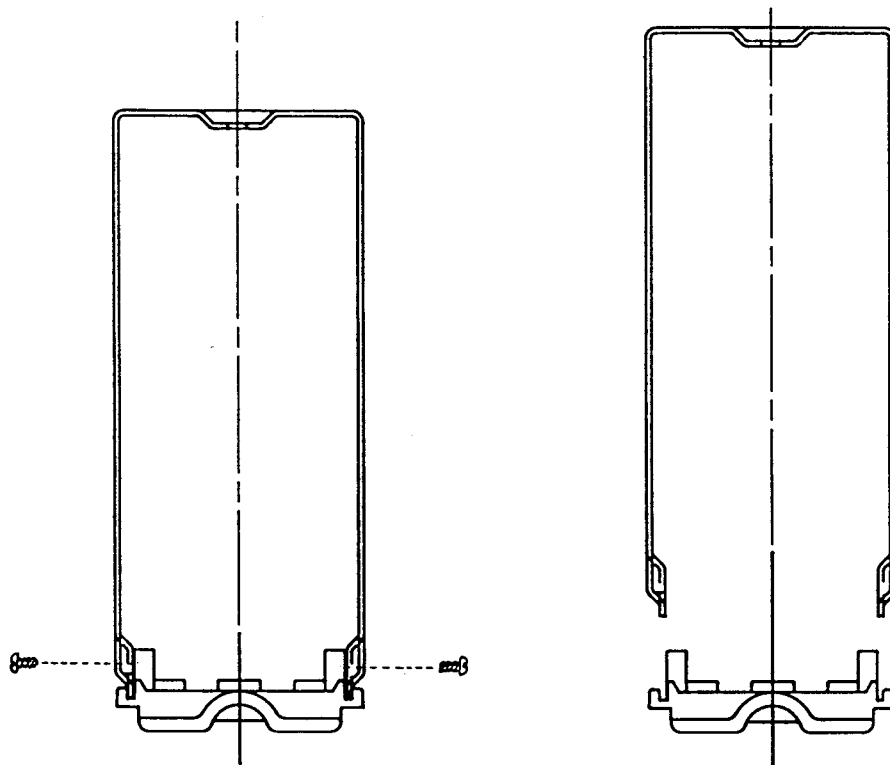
Module Base Cover Locating Groove and Interlock Feature
